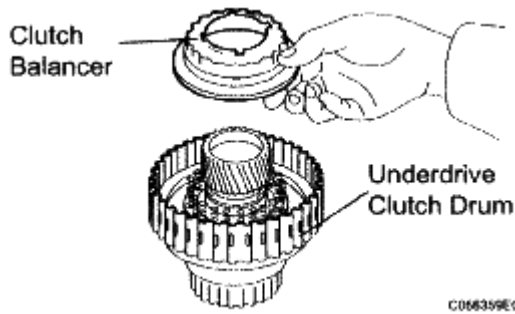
Removing Clutch Balancer From Underdrive Clutch Drum
